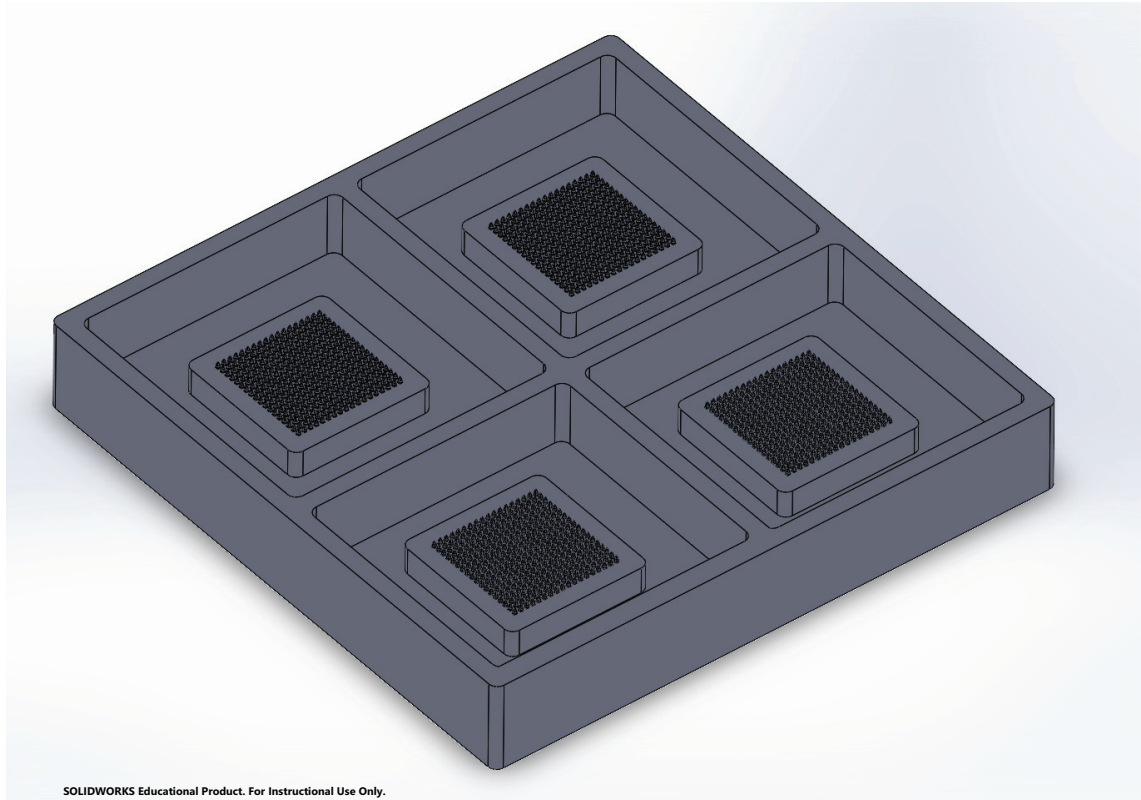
Master mold CAD model designed in SOLIDWORKS
